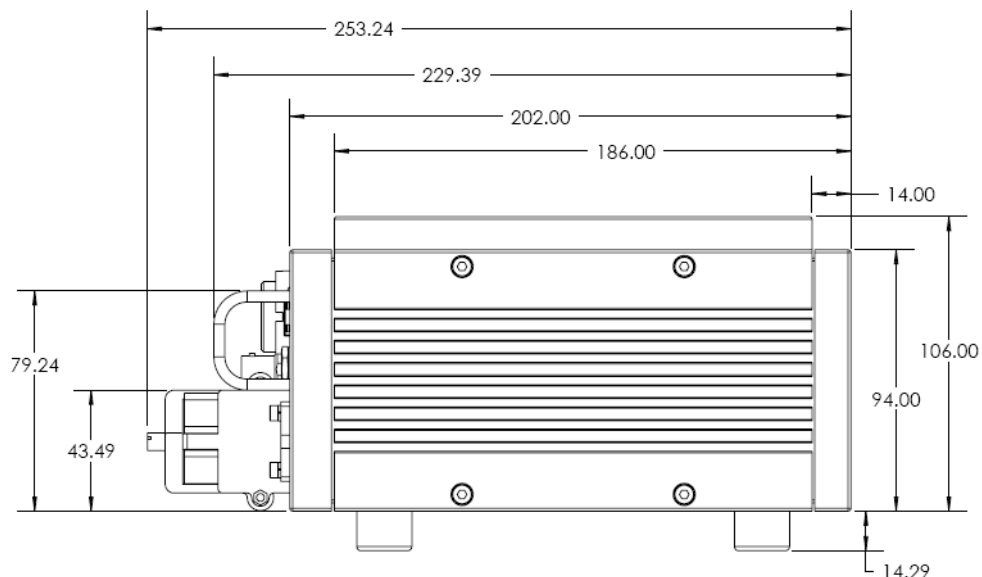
HG-TH Controller dimensions, side (in mm)
